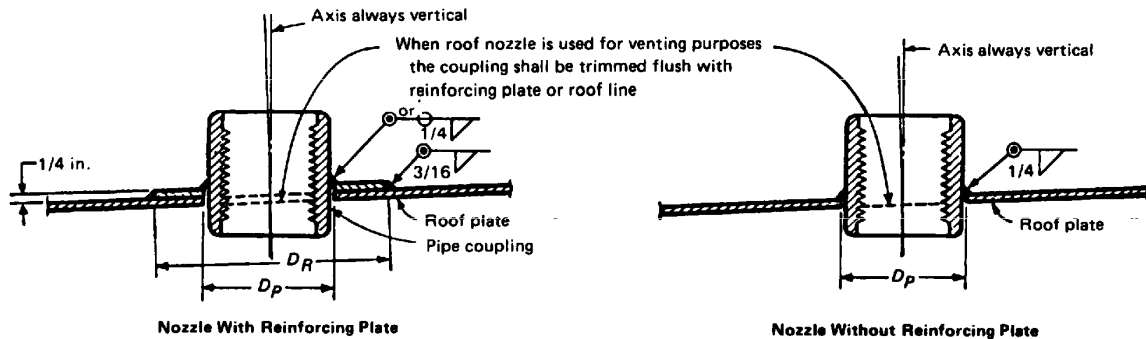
SCREWED OR SOCKET WELD ROOF NOZZLES
